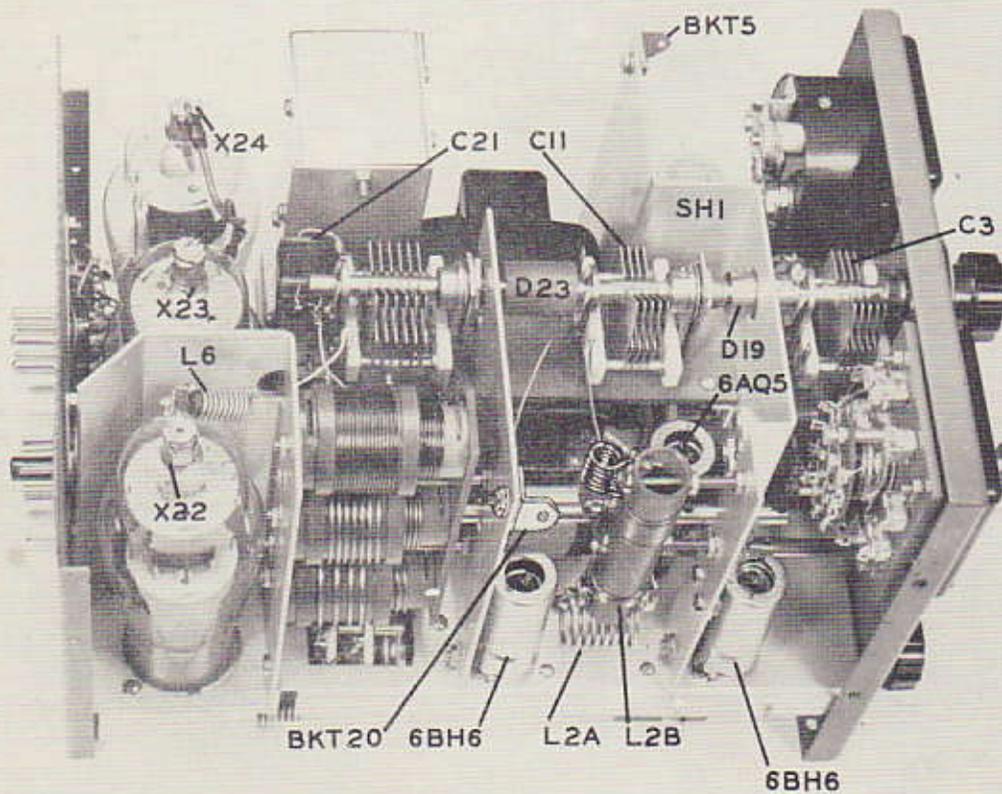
B LEFT VIEW OF COMPLETED ASSEMBLY
